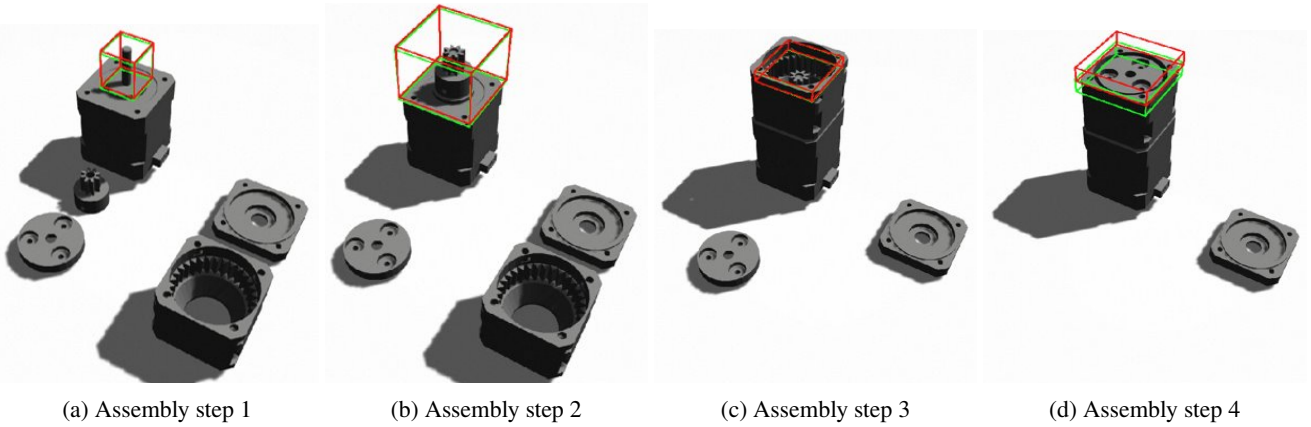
Estimated (green bounding box) and ground truth (red bounding box) 6D assembly poses for assembly steps 1-4 in planetary gear assembly: sun gear to motor (a), housing to motor (b), carrier to housing (c), cover to complete assembly (d).
